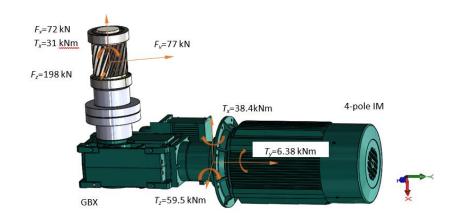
Example of an IM with HDO120 gear, coupling, bearings and pinion
